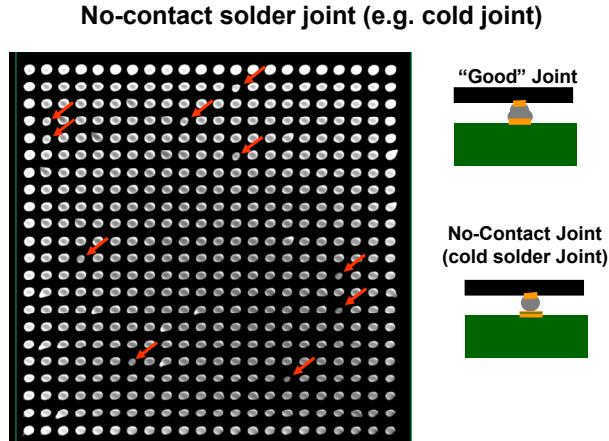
3D X-ray-CT analysis of no-contact solder defects (e.g. cold solder joints).
